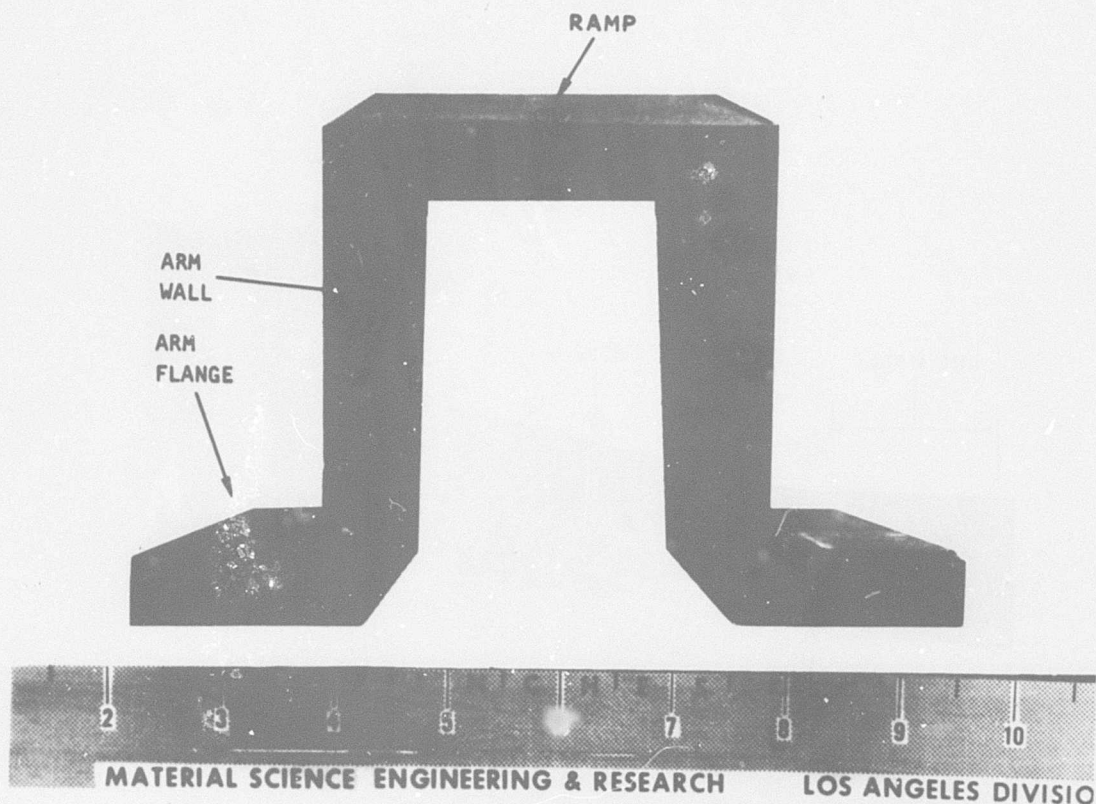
Cutaway View of Arm Showing Major Inspection Areas
